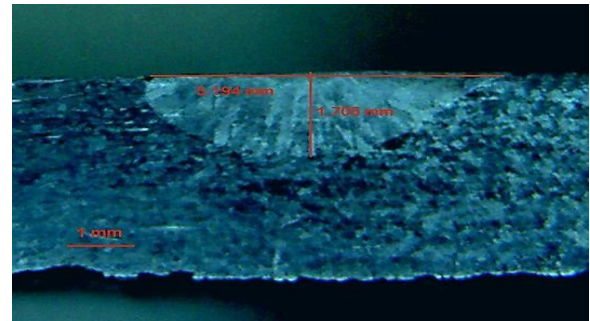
macrostructure of welded specimen using ZnO flux
